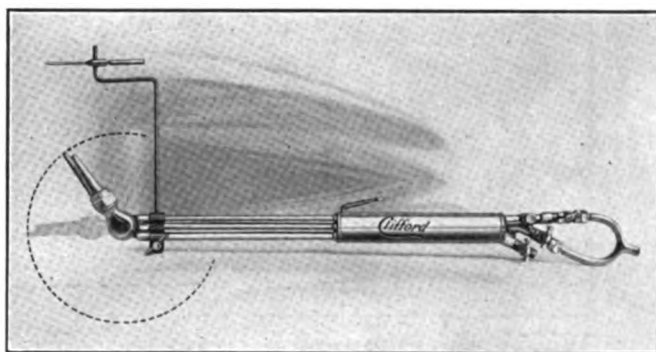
CUTTING TORCH EQUIPPED WITH RADIUS ATTACHMENT
